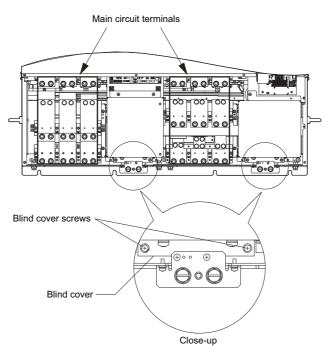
Air Filter Replacement: Removing the Blind Cover
